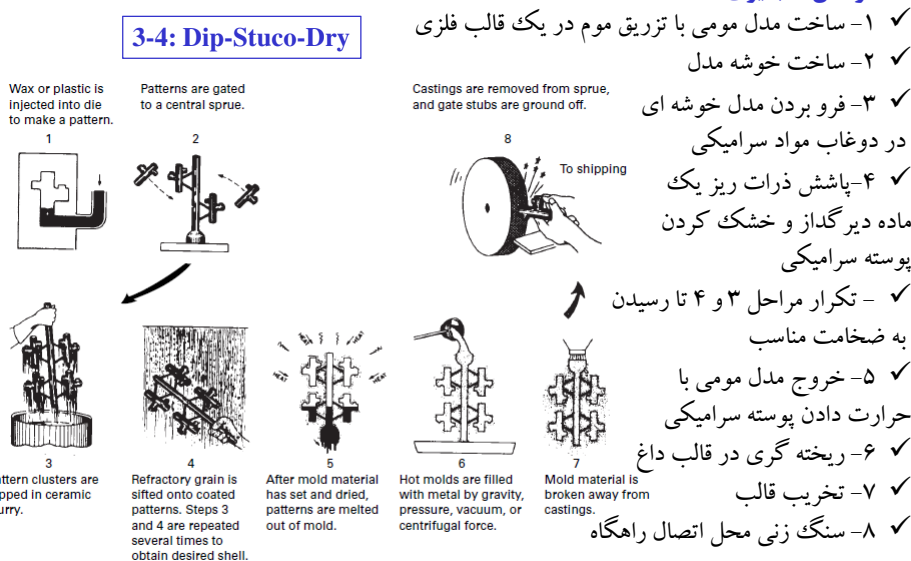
Investment casting steps for the shell-casting procedure. (Courtesy of Investment Casting Institute, Dallas, TX)
